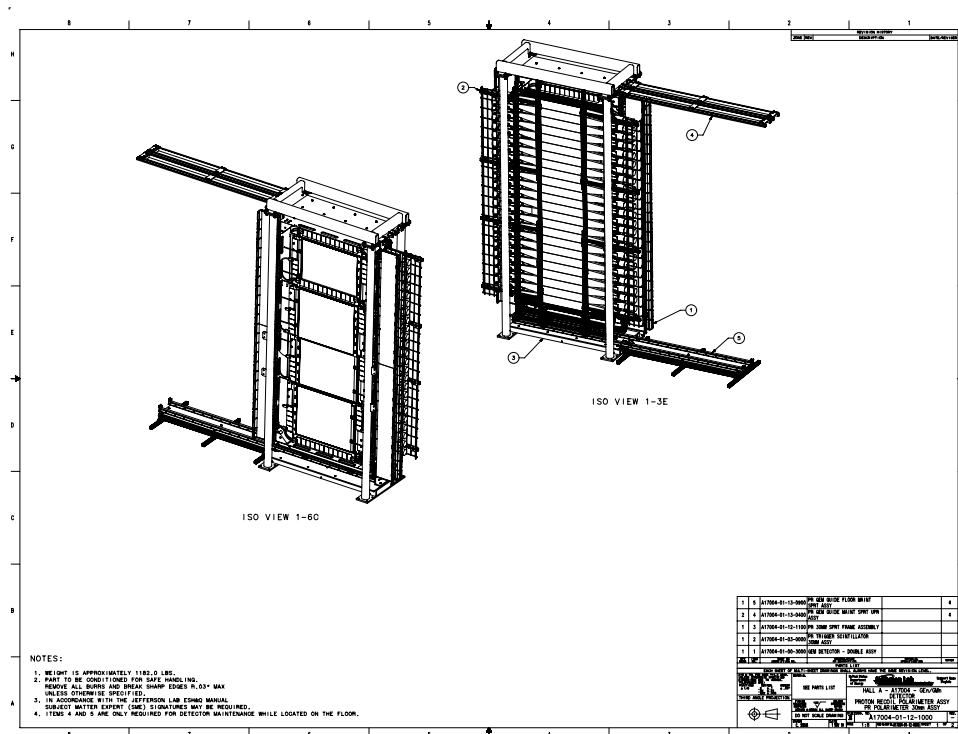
CAD model of one (beamline side) GEn-RP polarimeter side detector assembly. It contains UVa X-Y GEM layers and one 24 paddle hodoscope array. The second side detector is a mirror image. The rail extensions shown in this image are used only for installation or repairs, and are removed for production. The two UVa X-Y GEM layers are on a single rail mount, and the hodoscope array is on a second rail mount.
